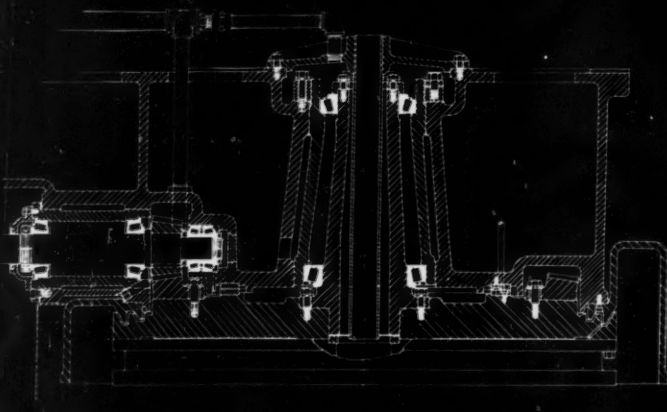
Both assembly and disassembly are facilitated and machine work on the housing is made simpler by design of bearings
